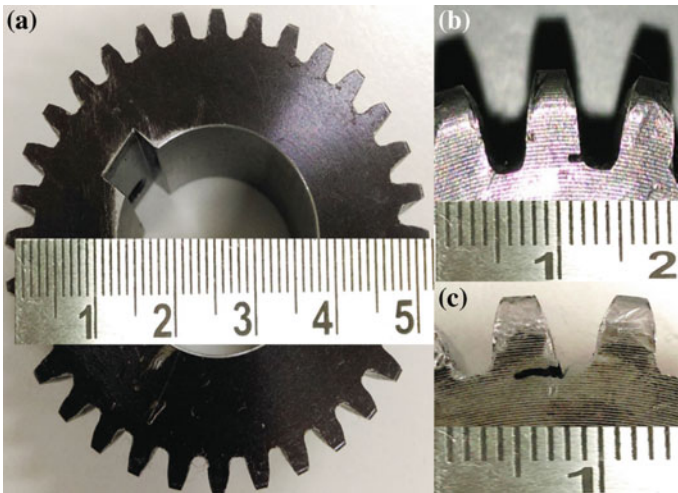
a Healthy gear; b initial crack gear; c advanced crack gear (crack lengths in mm)
